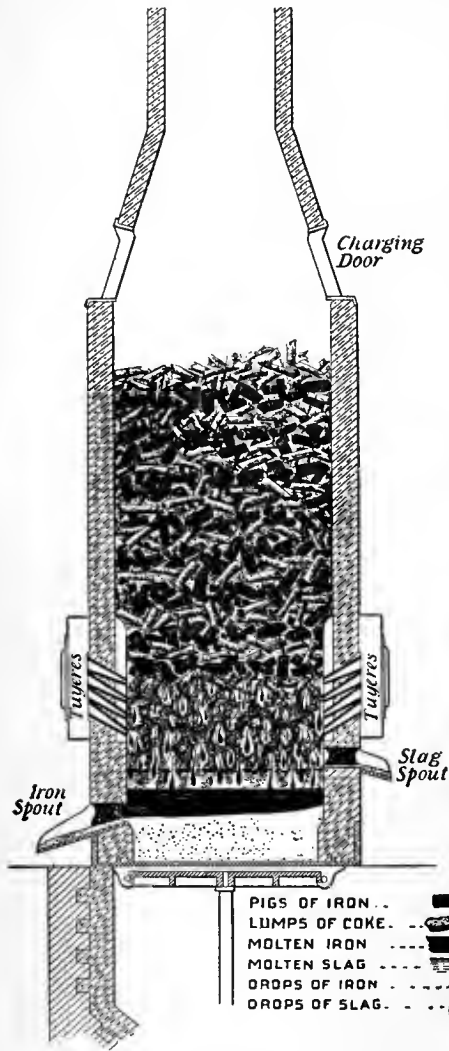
Cupola Furnace for Remelting Pig Iron.
